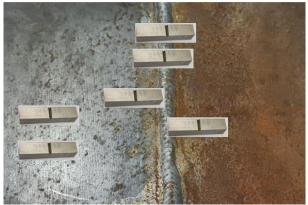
Representative Fig.s of charpy impact test samples taken from welded plates according to ASTM E23-02 "Standart Test Methods For Notched Bar Impact Testing Of Metallic Materials".
